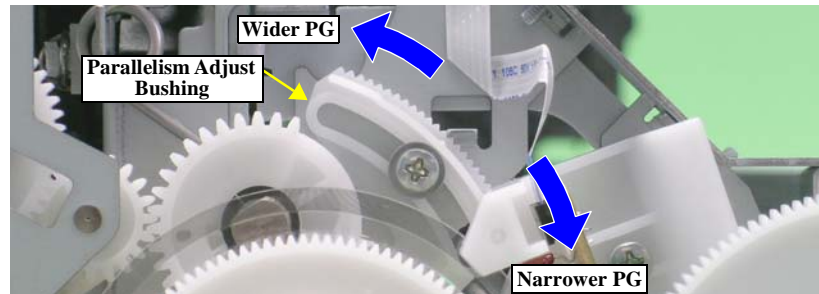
Relationship between Parallelism Adjust Bushing and PG
